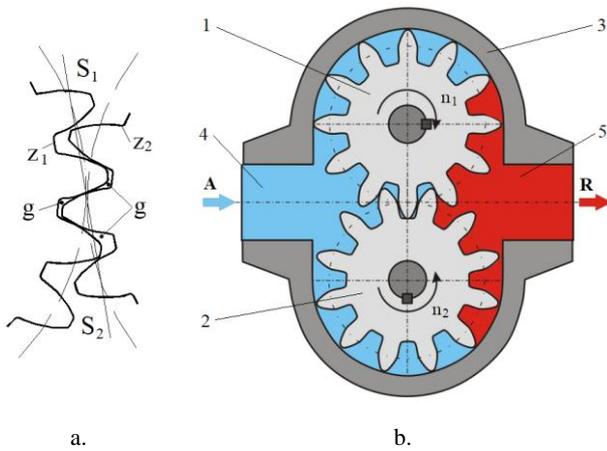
Pump with 2 spur gears: a - teeth section; b - gearing zone.
